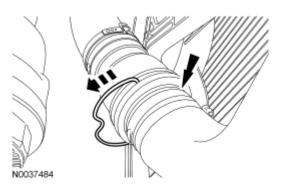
Removing Retaining Clip And Locating Lower Radiator Hose Courtesy of FORD MOTOR CO.
